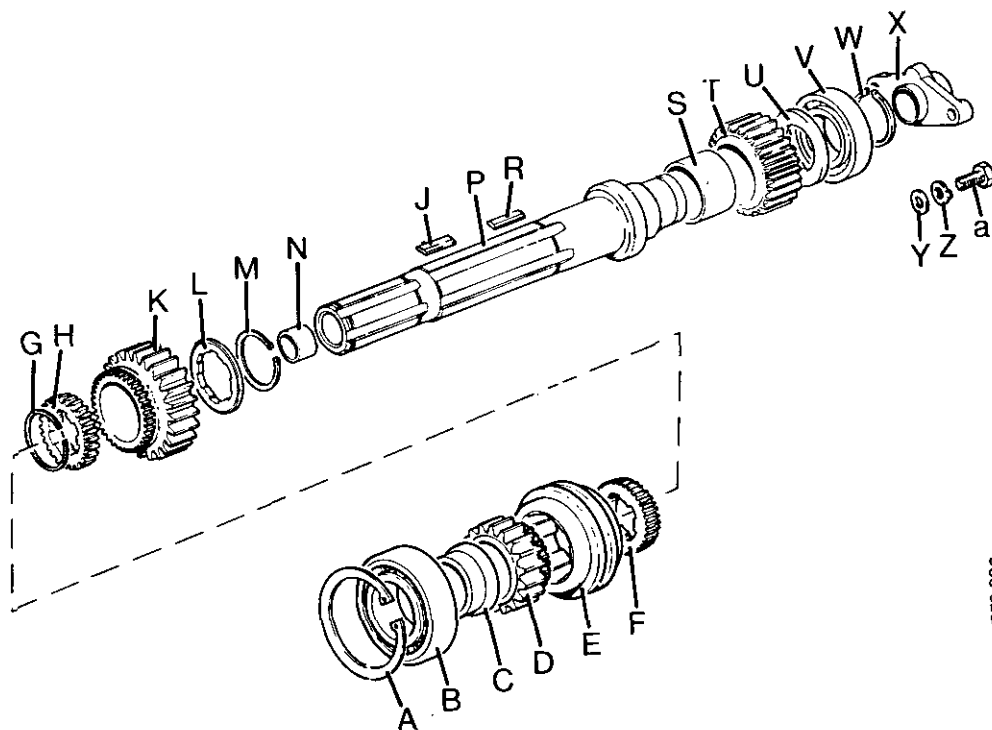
TOPSHAFT ASSEMBLY 1410 TRACTOR
